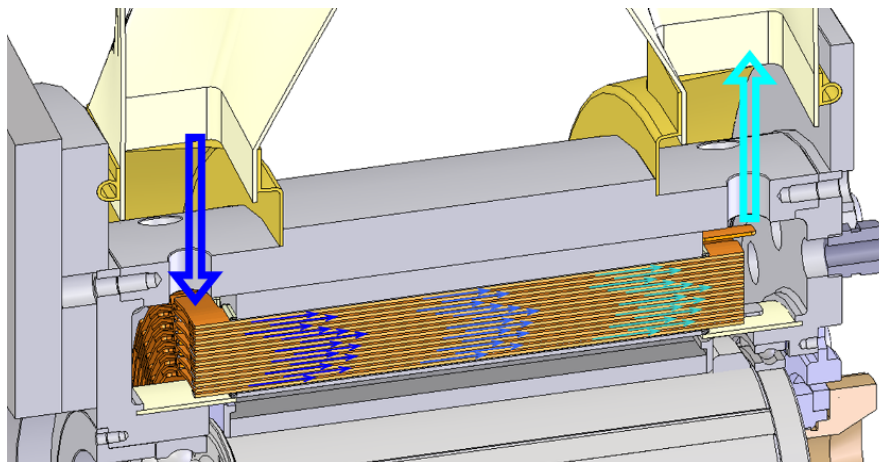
Cross-sectional view of the assembled stator and the coolant flow from the drive end towards non drive end
